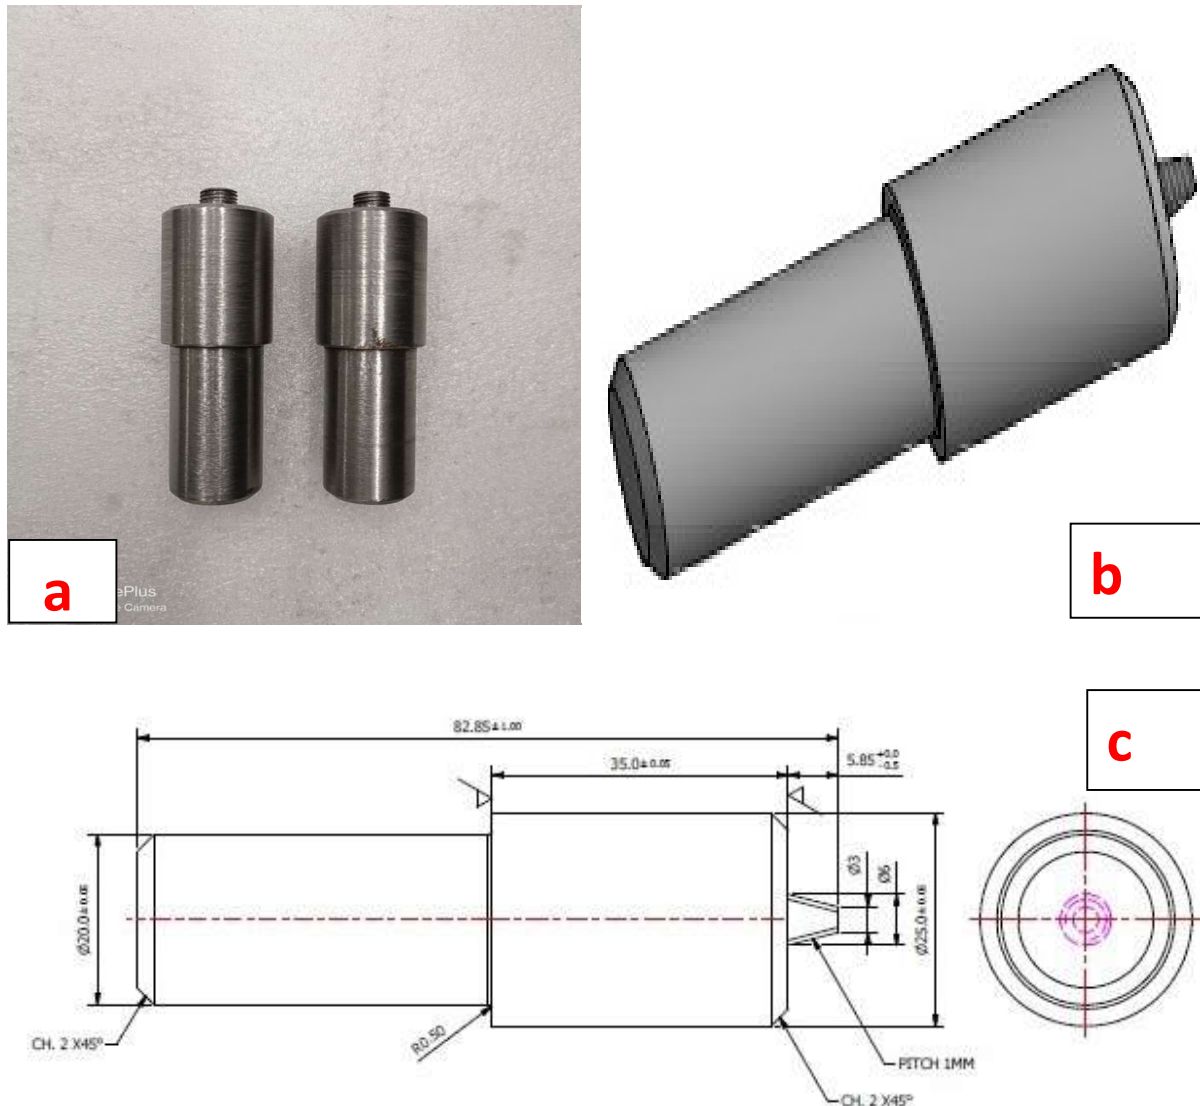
(a) FSW Tools by made by H13 Steel with Threaded Pin Profile (b) 3D view of FSW Tool drawn in Solid Works software (C) 2D detail dimension of FSW Tools
